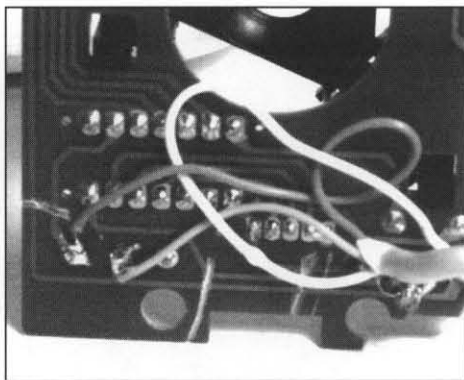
Cut traces as needed to isolate the switches, and solder the cable wires to them.
